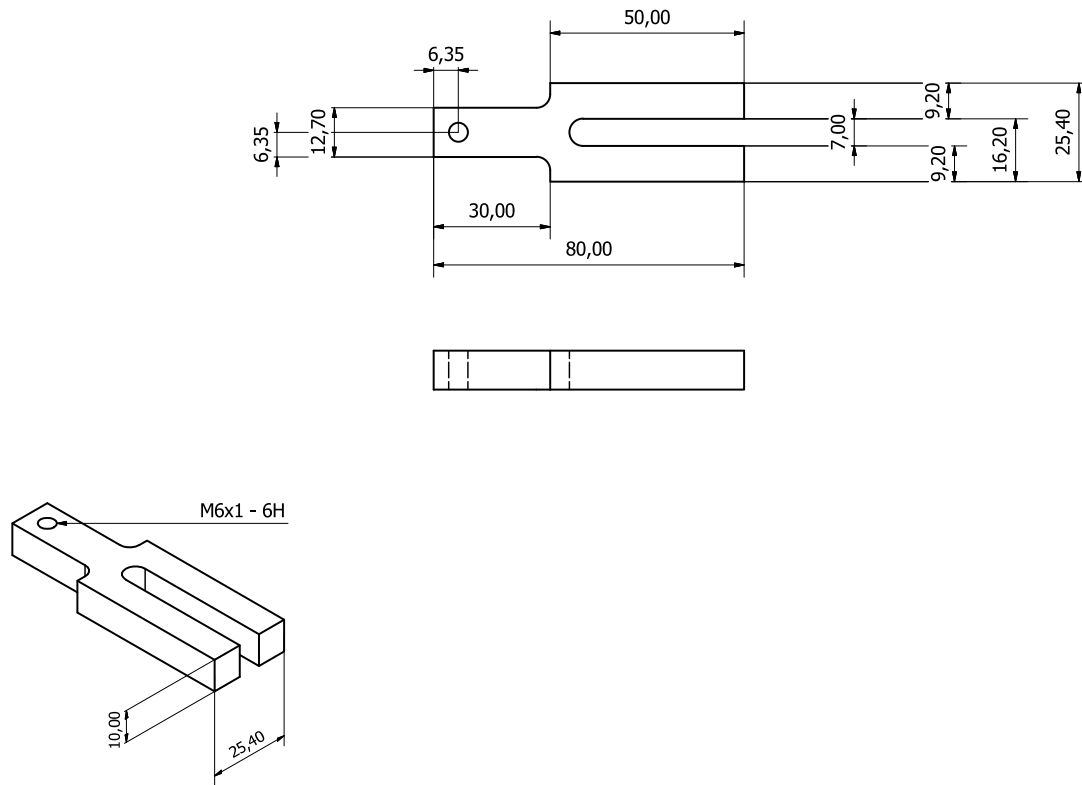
Technical drawing of the image splitting dichroic mount. Material: aluminium.
